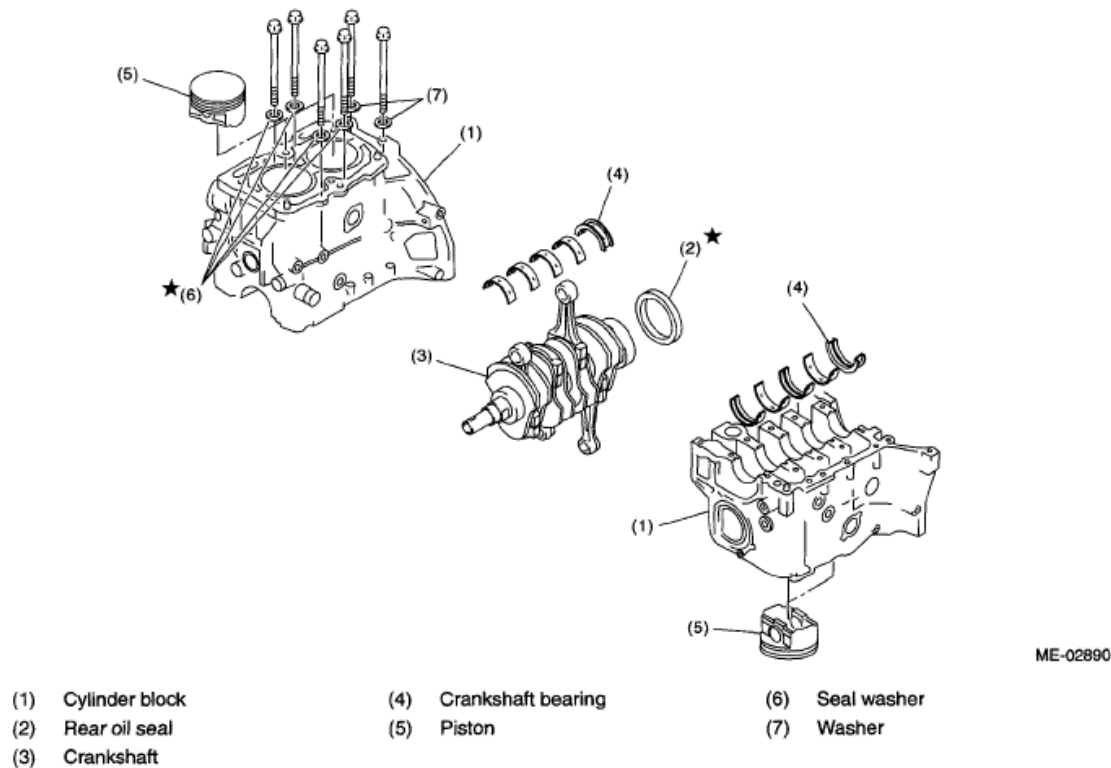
Identifying Cylinder Block, Piston, Crankshaft, Rear Oil Seal And Seal Washer
